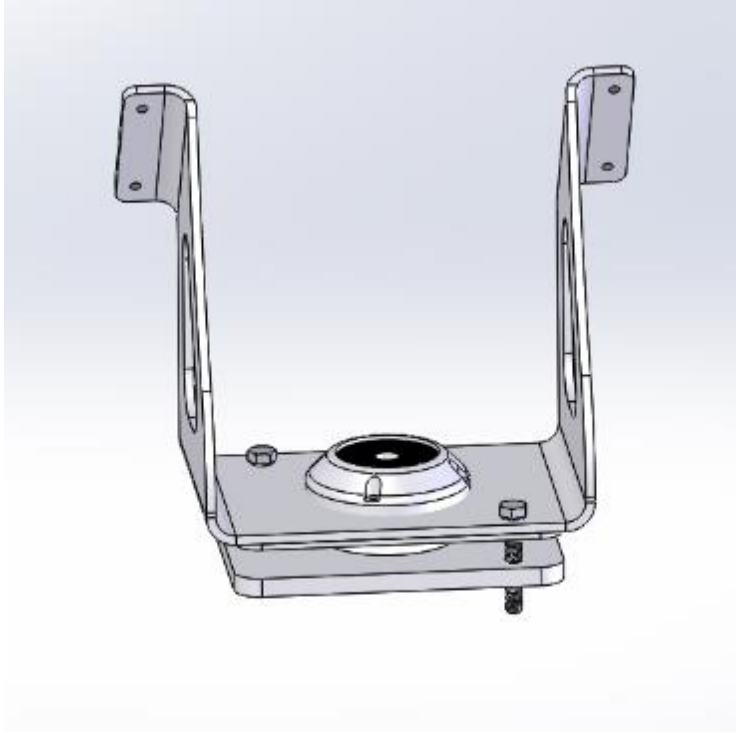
Image of the bracket assembly showing the external UAD bracket and the internal mounting plate.
